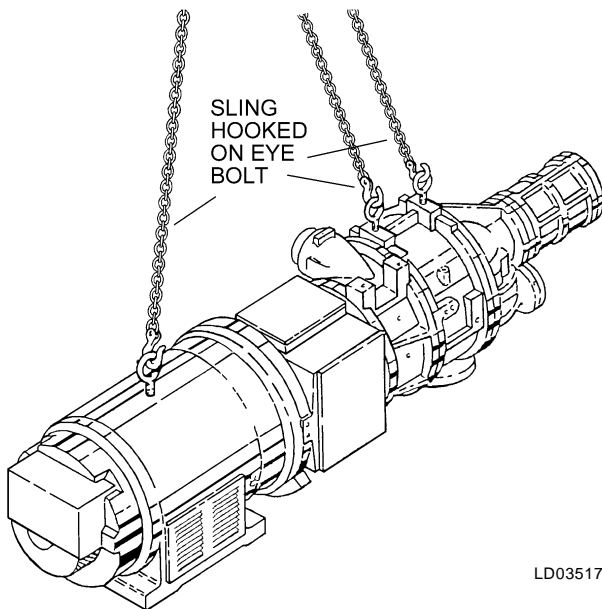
RIGGING COMPRESSOR ASSEMBLY
